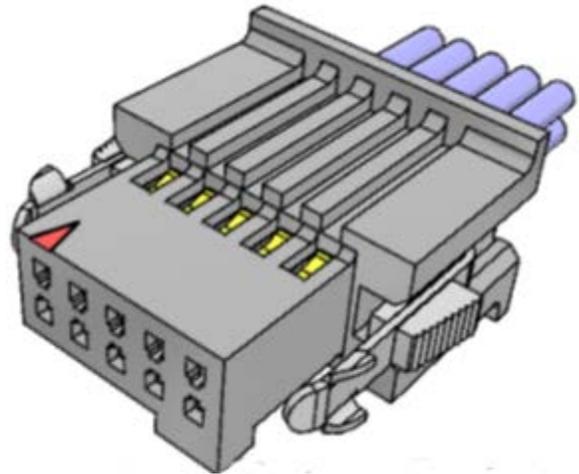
Cable Assembly SFSD-05-28-H-03.00-SR
